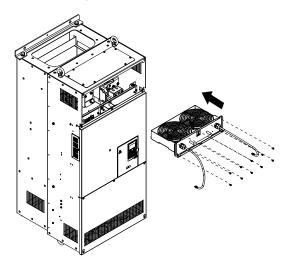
Insert the Cooling Fan Unit: 4A0302
